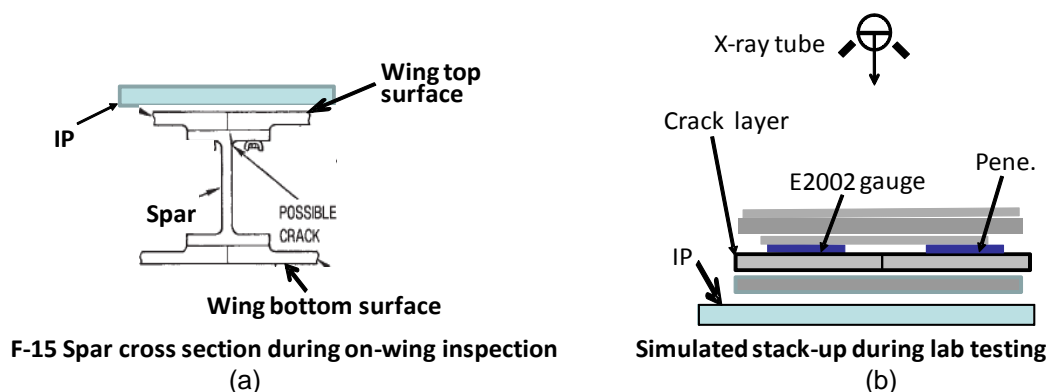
(a) F-15 Outboard Torque Box Spar Schematic Cross Section and (b) Specimen Stack-Up Used in Laboratory Testing
